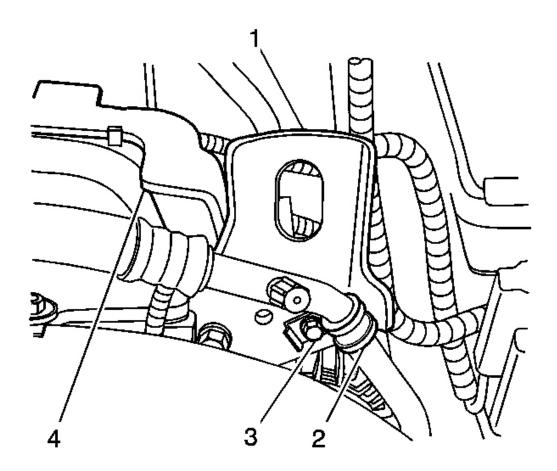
View Of Engine Lift Bracket & Attachments Courtesy of GENERAL MOTORS CORP.
